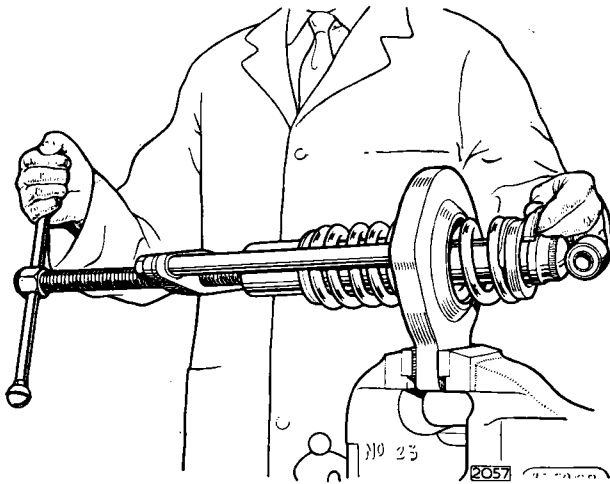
Removing the rear road spring from the hydraulic damper with Churchill tool J.11A in conjunction with SL.14
